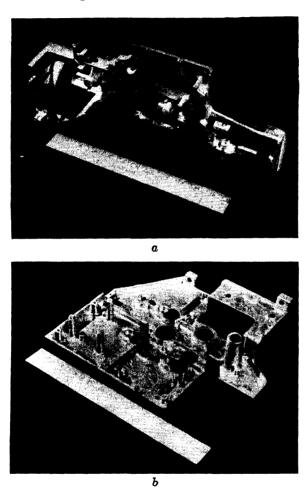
These two die-cast aluminum parts graphically show the importance of bosses and projections for bearing surfaces, fastening points, and strengthening purposes. The casting at a is a side frame and motor housing for an electric typewriter, while that at b is the side frame for a business machine.
